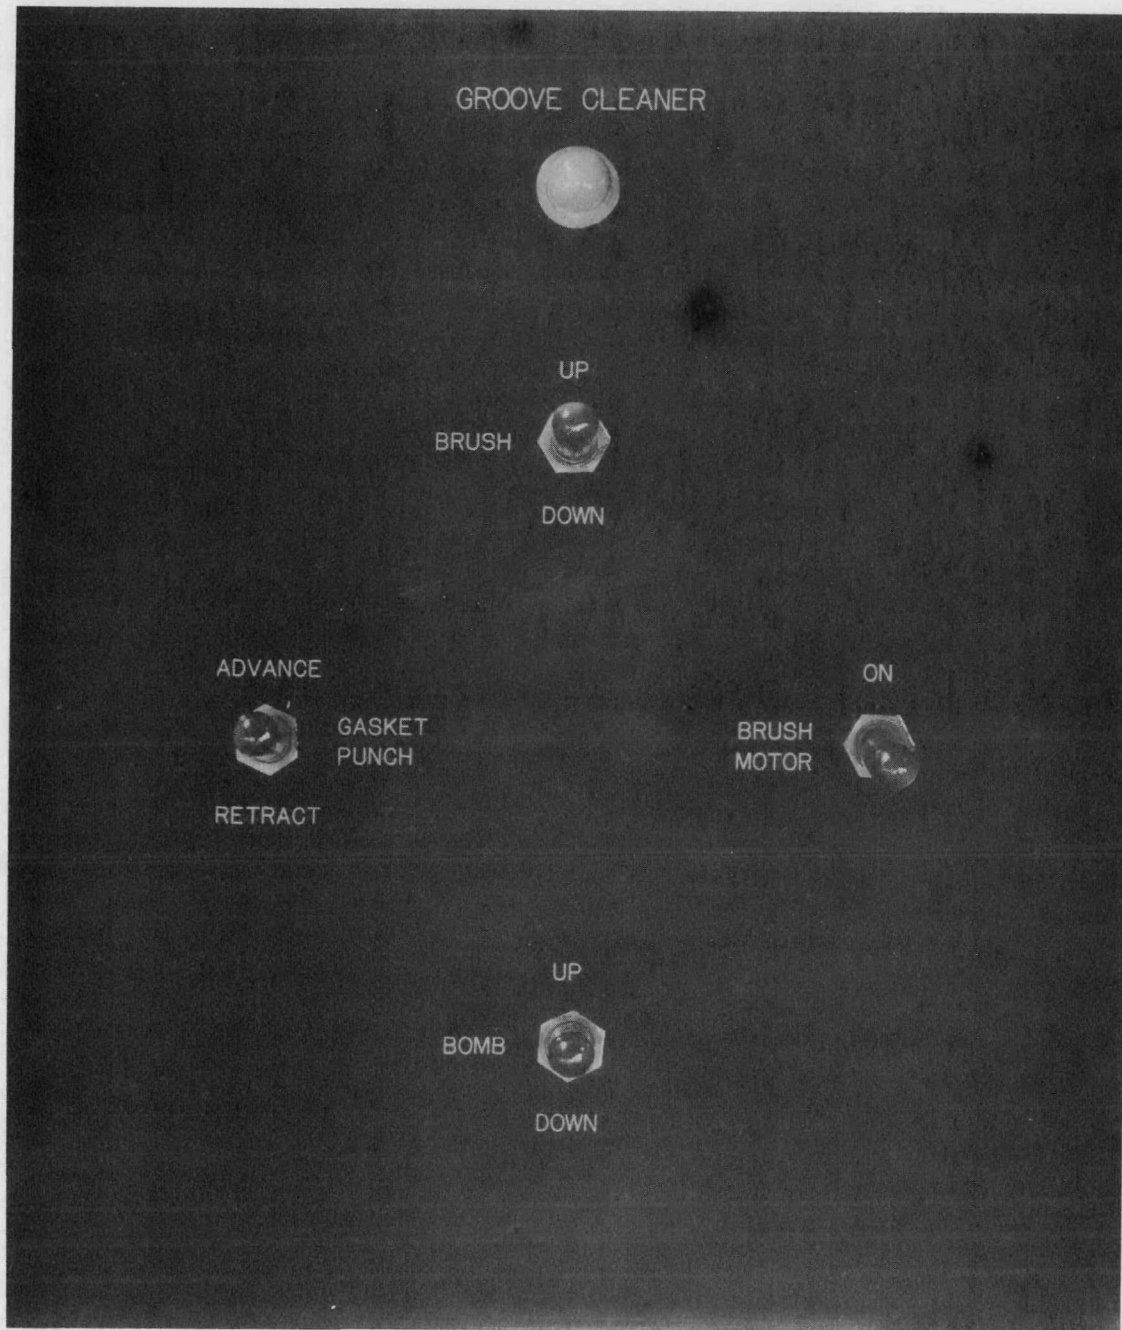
Control panel for gasket remover-groove cleaner unit.
